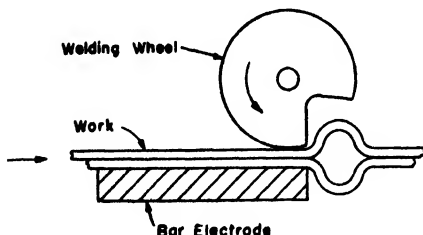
Use of niched welding wheel for seam welding to a header.
